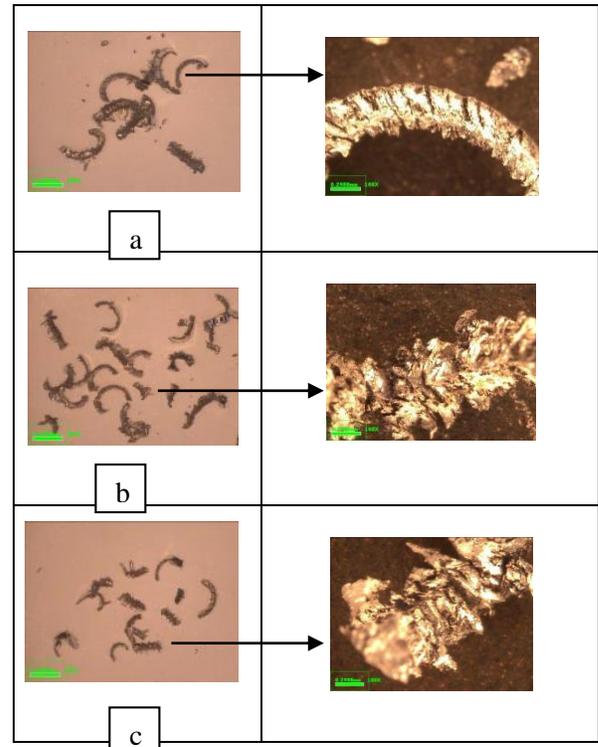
AISi/AlN MMC chips, machined using a coated insert TiN, at different cutting speeds of (a) 230 m/min, (b) 300 m/min, and (c) 370 m/min
